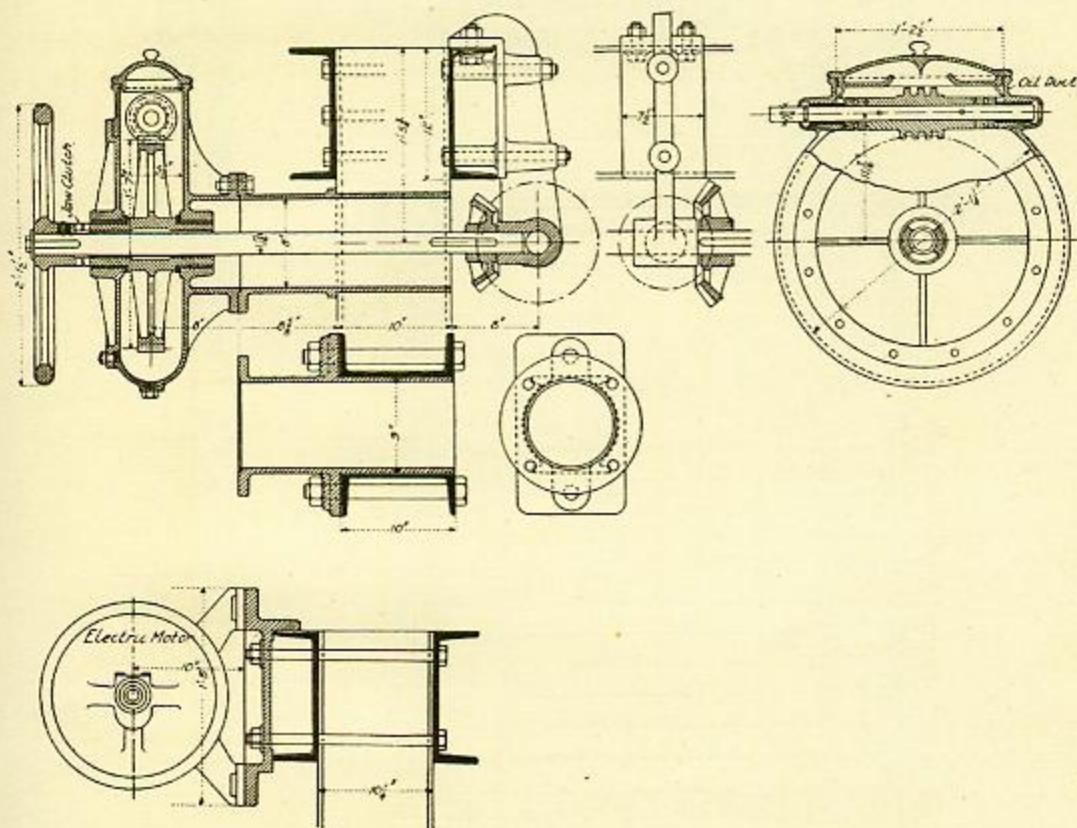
Details of Raising Device for Head Gates, shown in Fig. 19.
